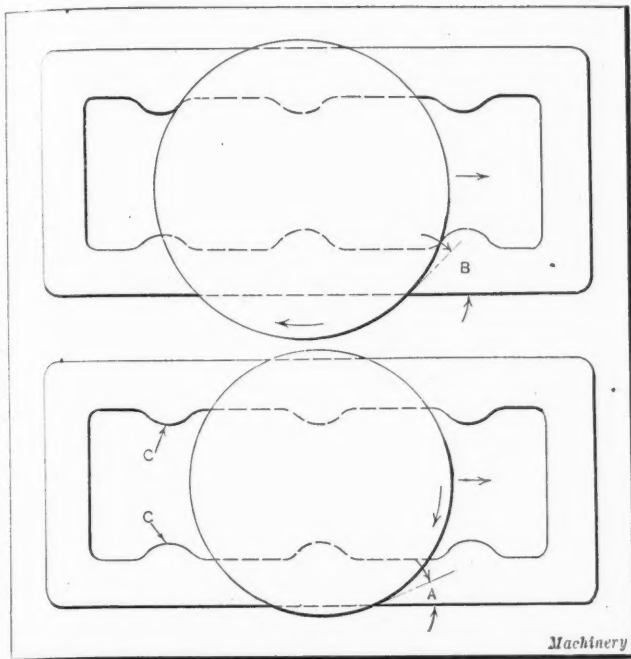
Diagrams showing the Advantage of using a Face Milling Cutter somewhat Larger in Diameter than the Width of Surface to be milled
